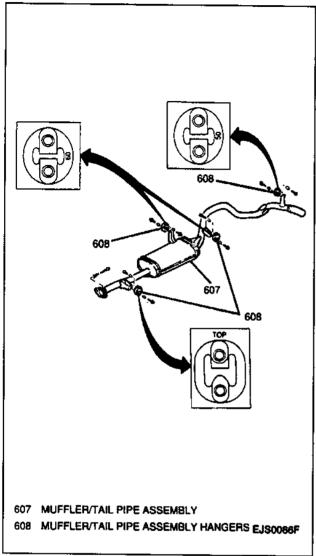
Muffler/Tail Pipe Assembly Hanger Positions (Typical)
